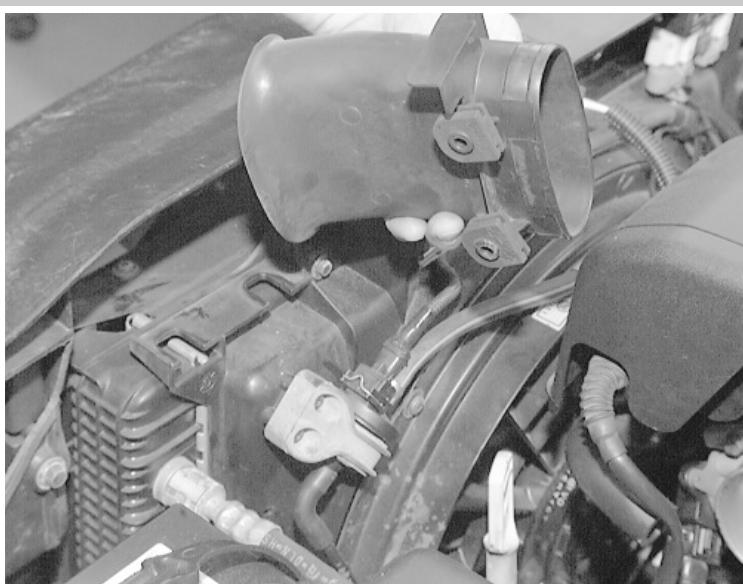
Remove the air hoses from the control module box and the air cleaner
